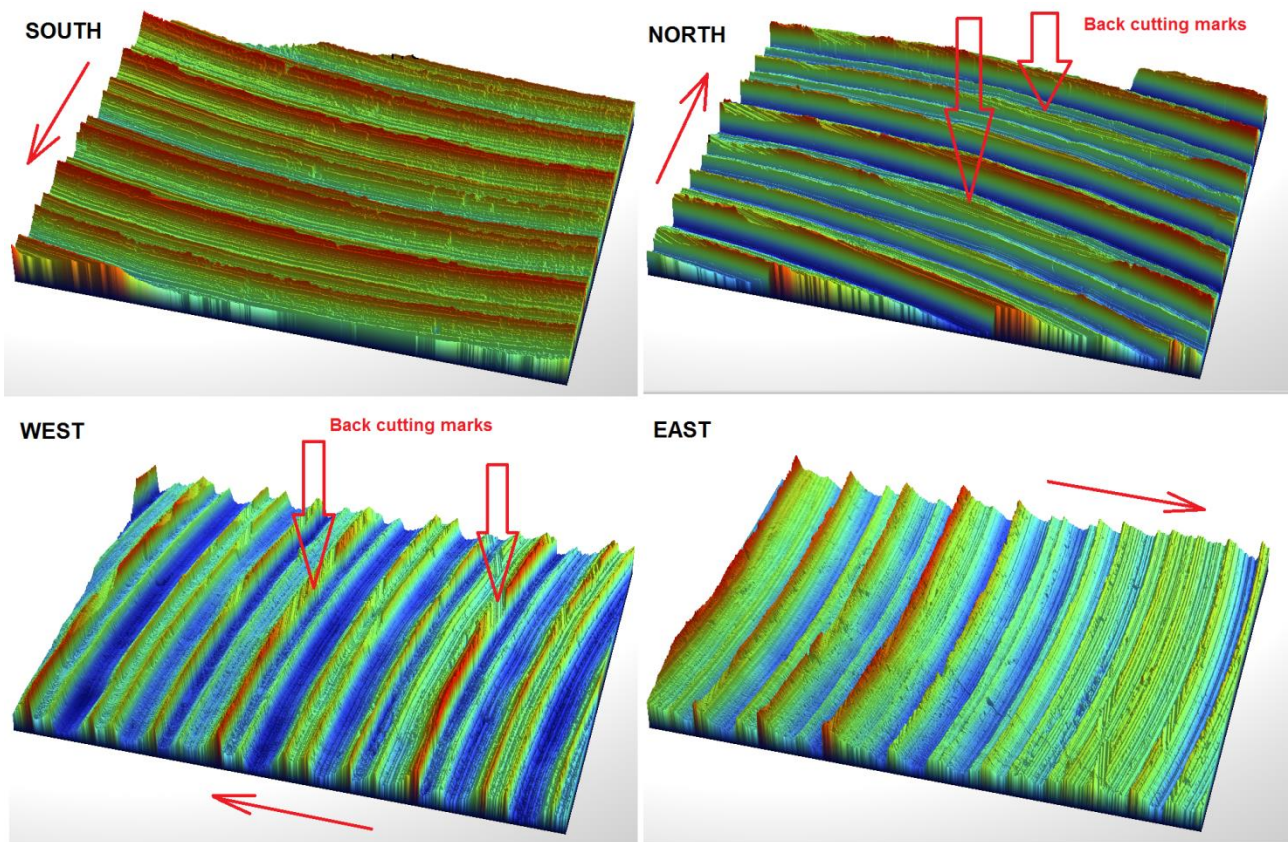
Samples #1 - #2, Feed = 0,1 mm/tooth, material 1.1730 – Machined with KONDIA milling machine
